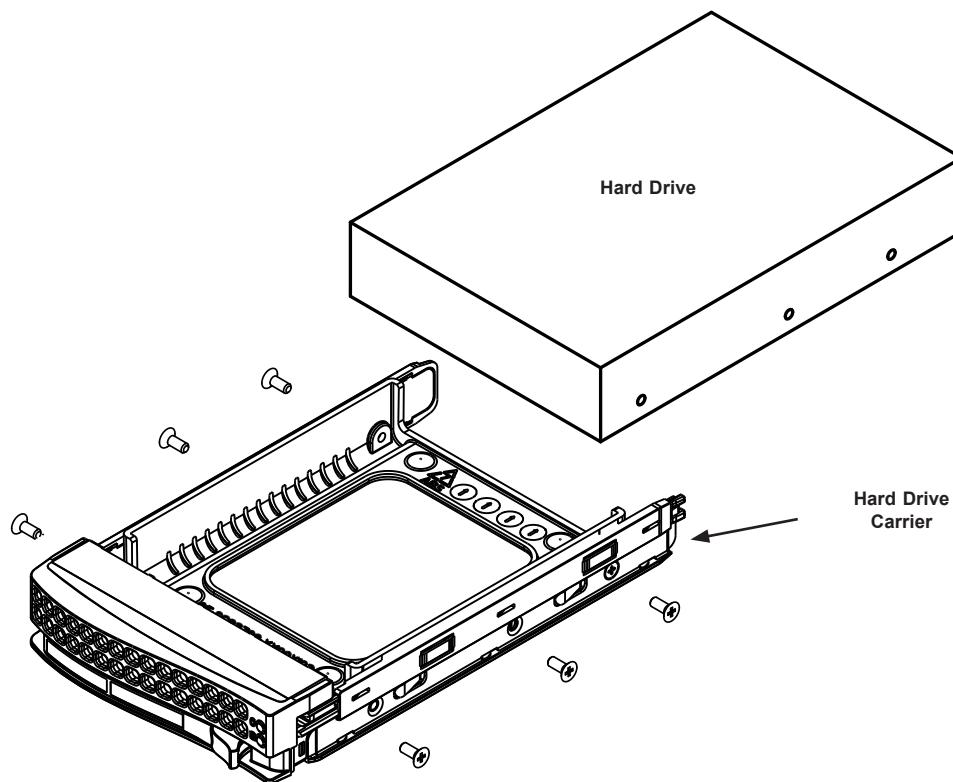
Installing a Hard Drive into Hard Drive Carrier
